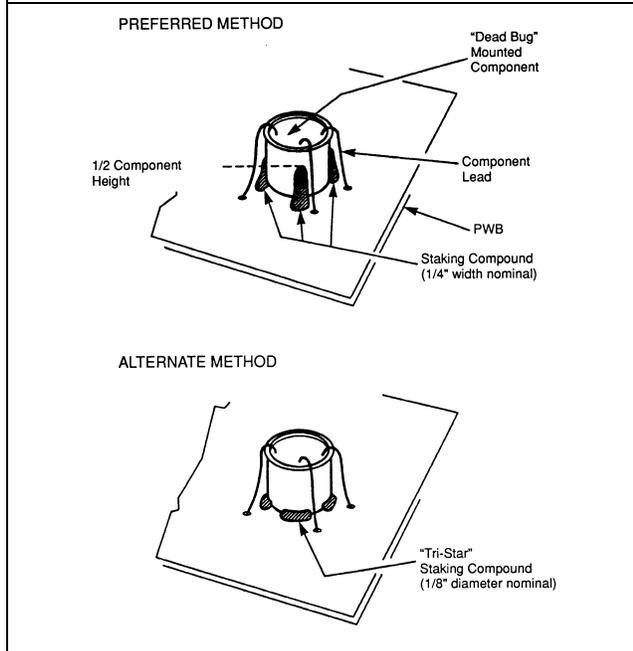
Typical Staking of "Dead Bug" Cylindrical Components
